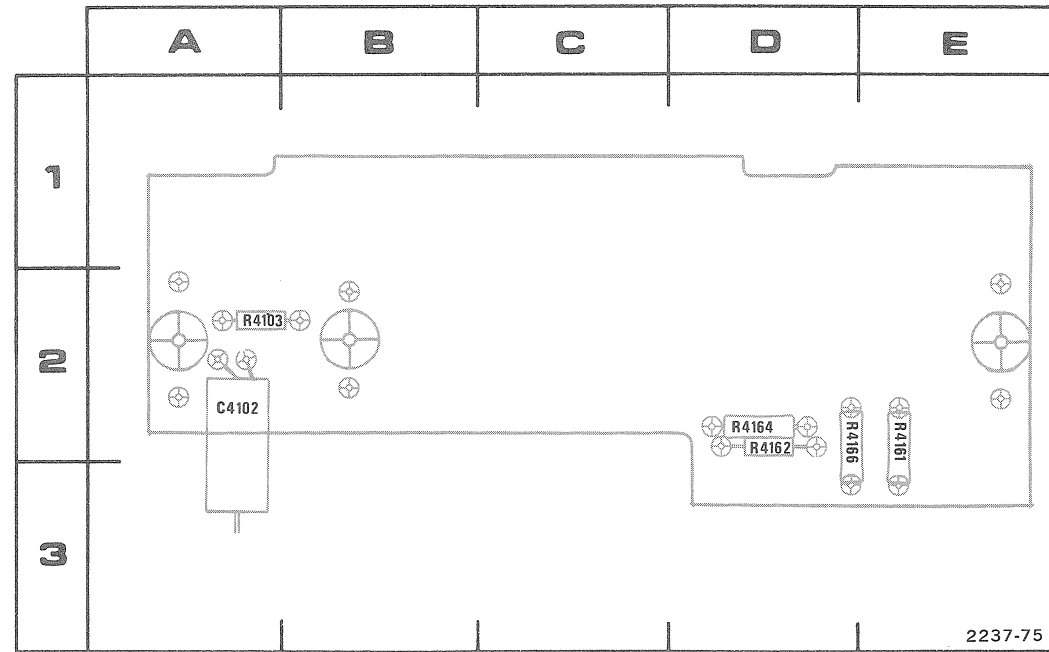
A1 Cam Switching board (bottom) component locations.
